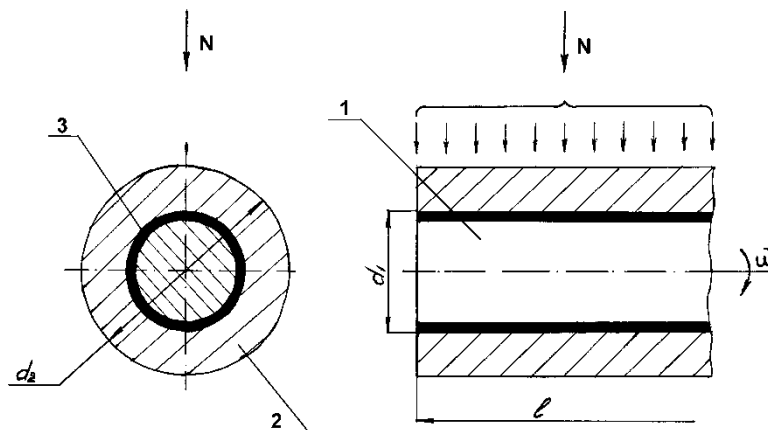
Scheme of contact tribocoupling of parts with a polymer coating: 1 - shaft; 2 - sleeve; 3 – polymer coating.
